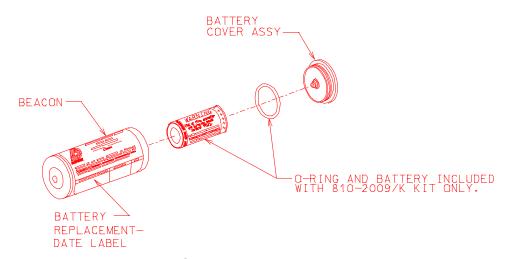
Beacon Exploded View Showing Relative Location of Battery and Related Parts
